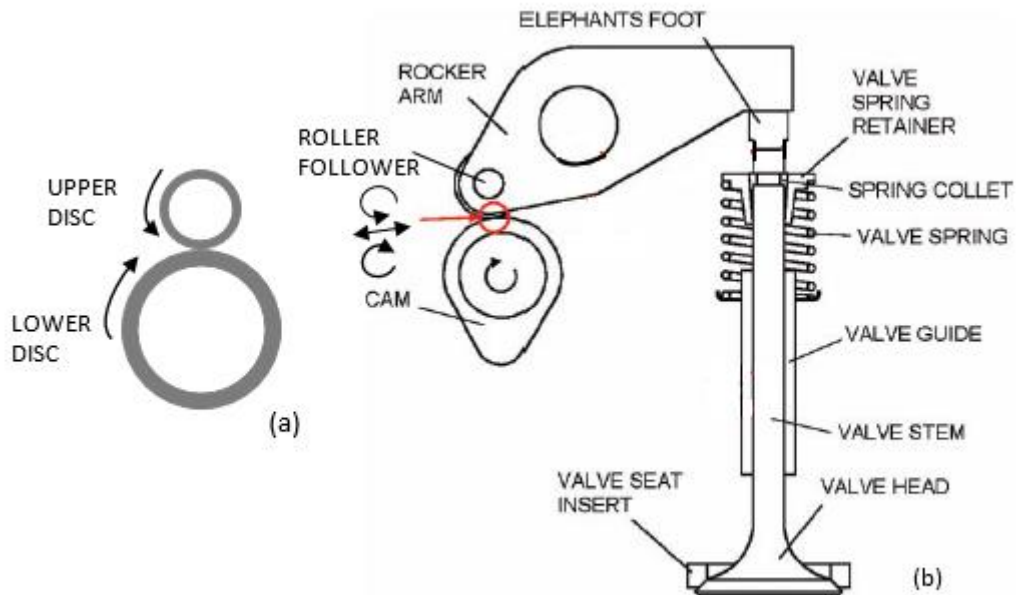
Schematics of the the experimental arrangement (a) ring-on-ring simulation (b) valve train's cam lobe/roller follower contact geometry [2]
